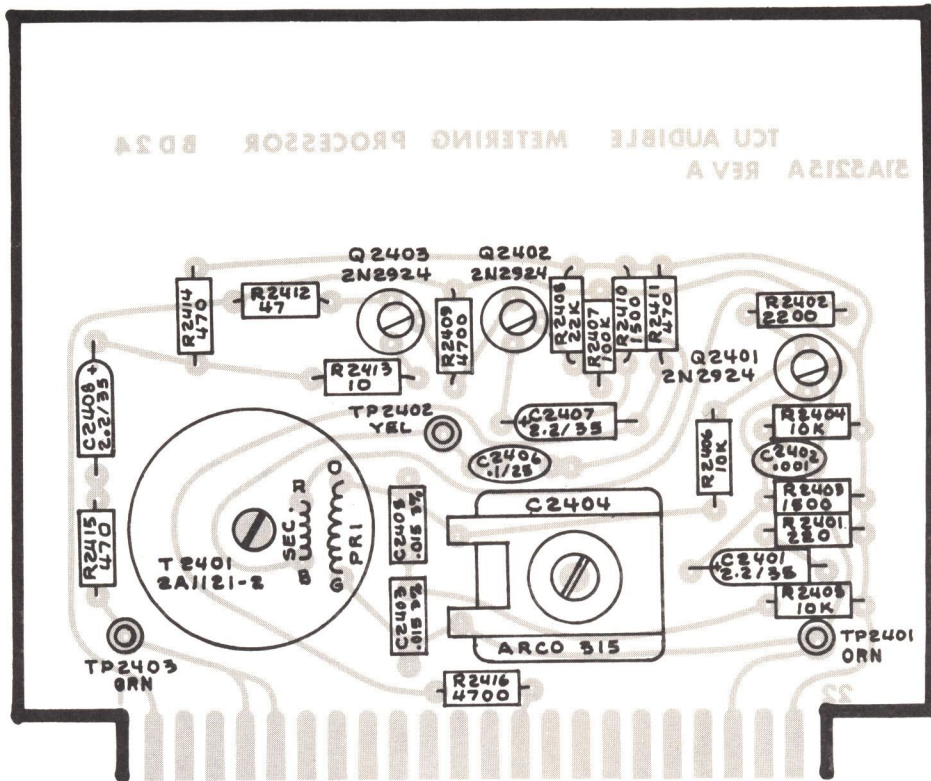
TCU Audible Metering Processor (Board 24), Parts Location
